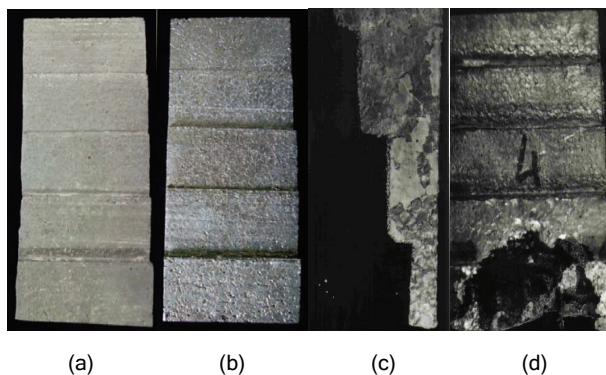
The surfaces of the step probes (from left to right): a) clean surface, thinner coating layer 5×10^{-4} m; b) a rugged surfaces, a thicker coating layers above 1×10^{-3} m, less permeability to gases; c) sintered sand on the castings surface; d) metal penetration into sand.
